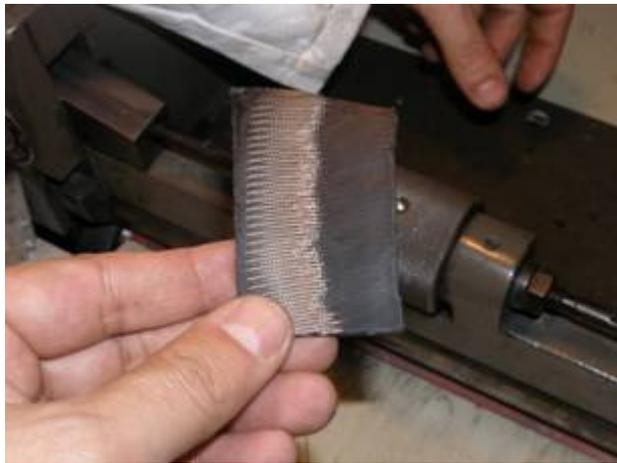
Sub-step 2B: Chafer and bead filler cut from the sidewall assembly
